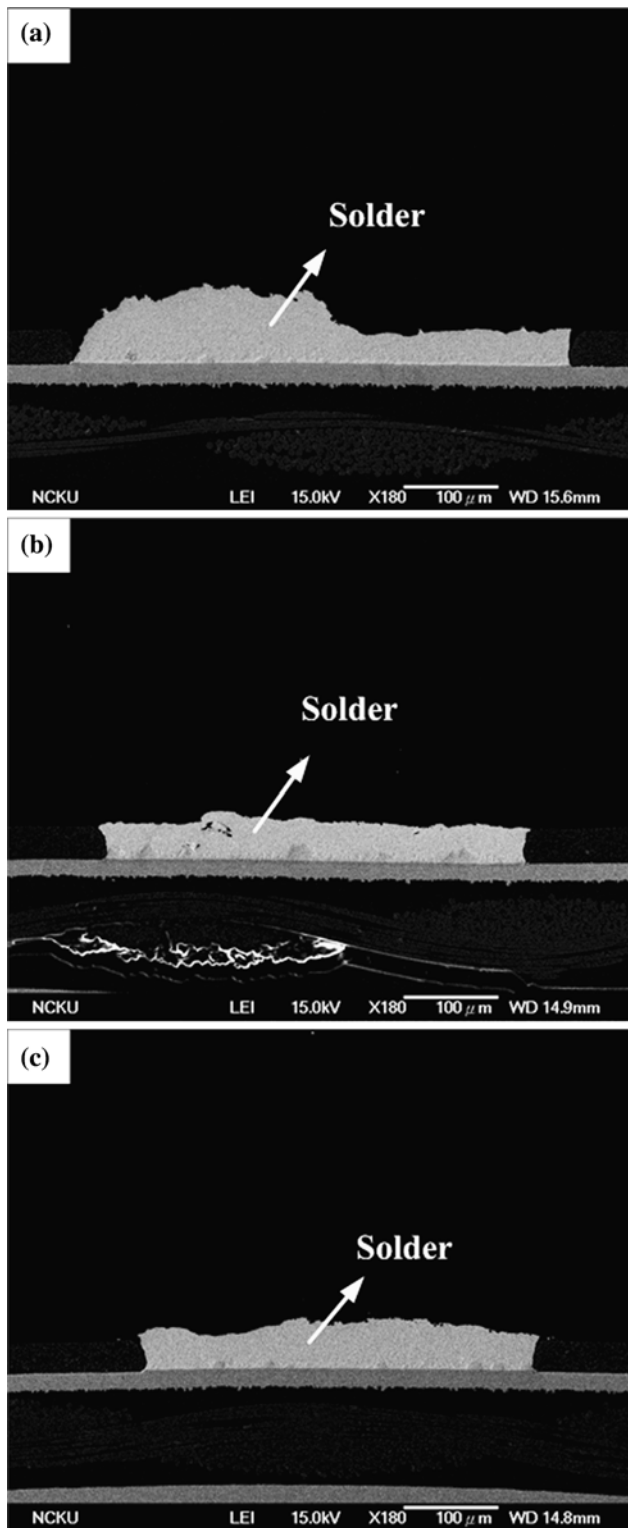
Cross-sectional fractures of the Sn–Ag–Cu joints after (a) single reflow, (b) ten reflows and (c) aging for 1,000 h
